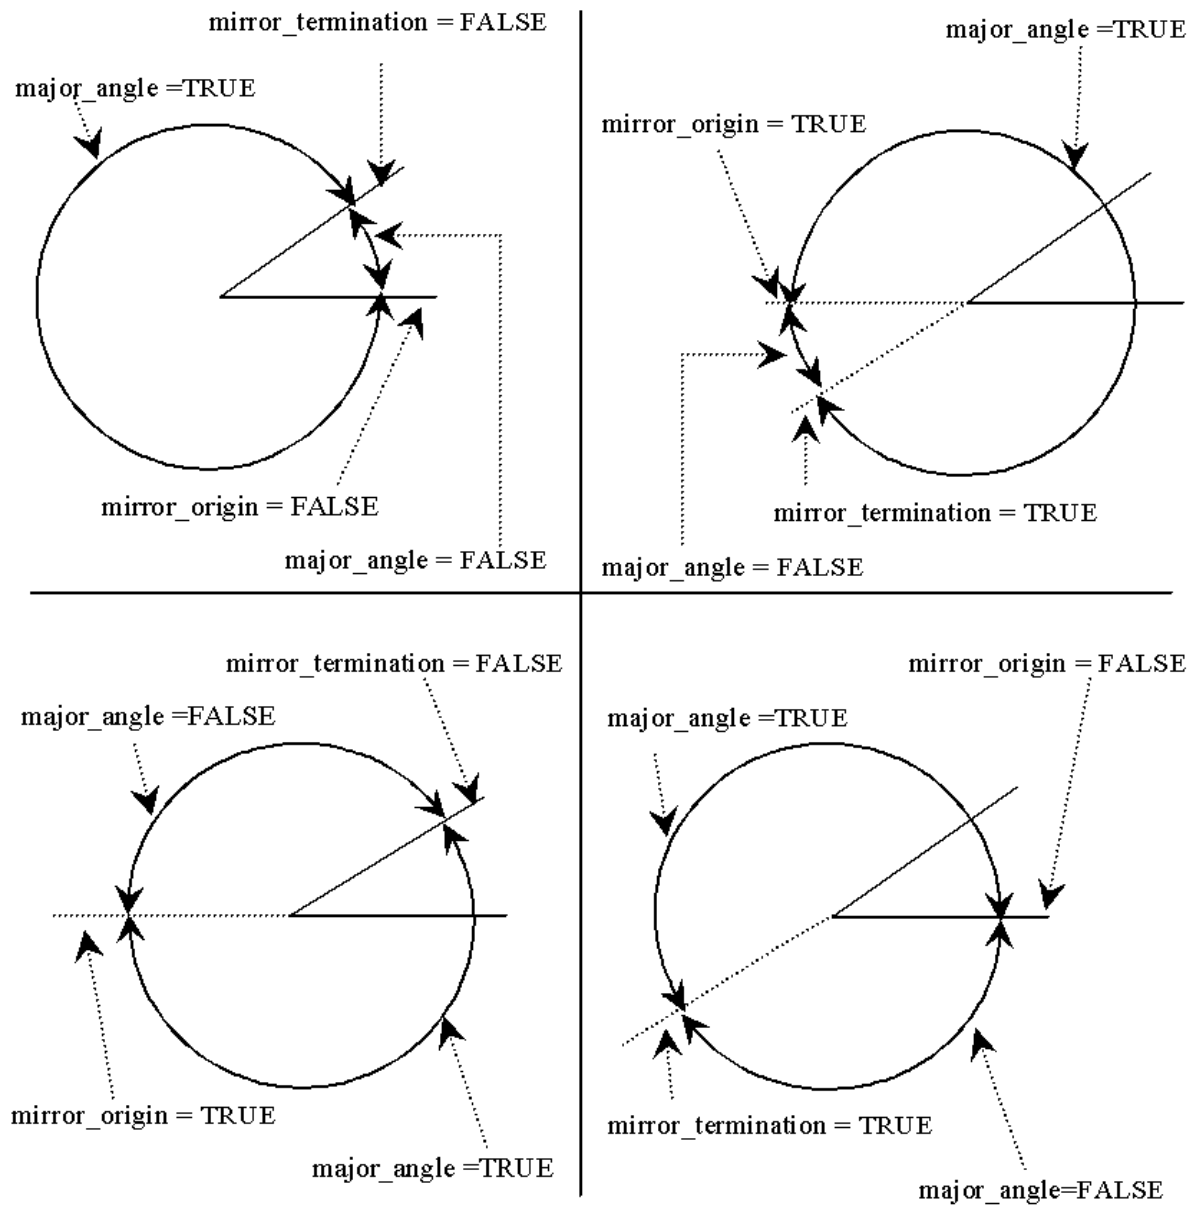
Angular_dimension_tolerance attribute usage
